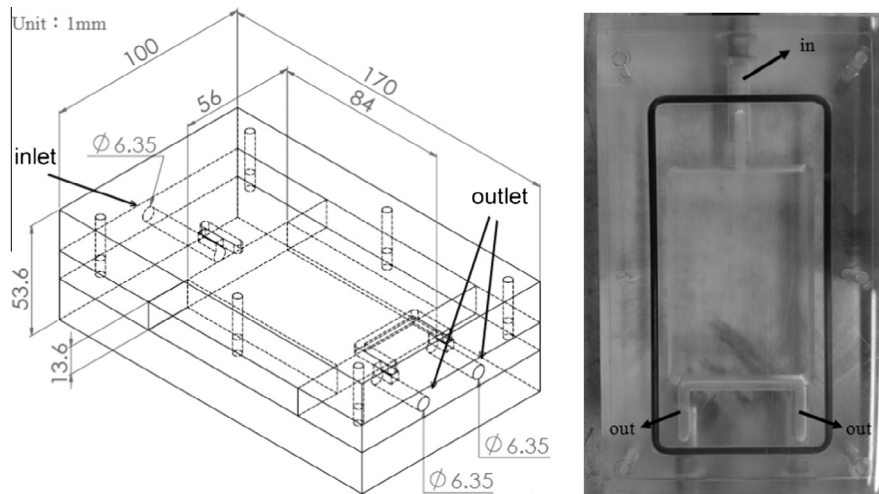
Design of the transparent transfer mold and the top view of the mold where one inlet from one side and two outlets at the other side.
